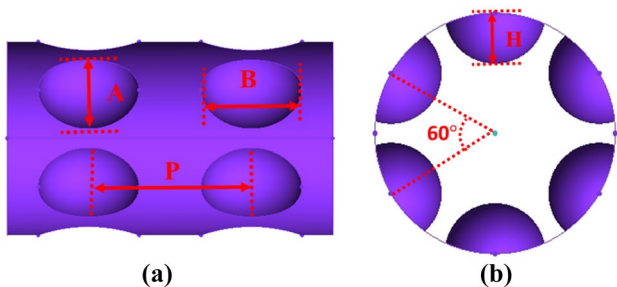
The schematic a cross-sectional and b inner side view of the elliptical dimpled tube
